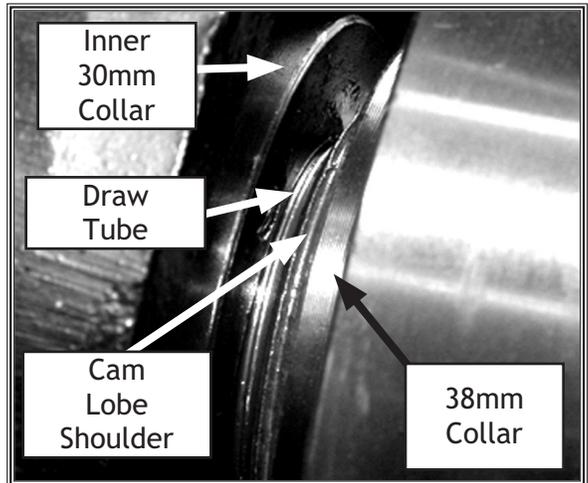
Inner 30mm collar nearly touching threaded cam lobe shoulder.
